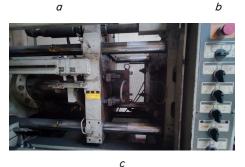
Injection molding machine: *a* – injection molding machine; *b* – plastic drying funnel; *c* – injection mold
